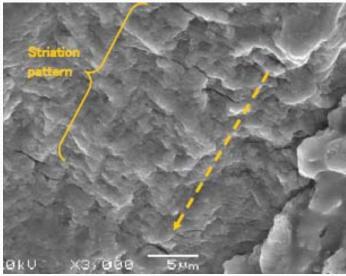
DETAILED INSPECTION- FRACTURE SURFACES
